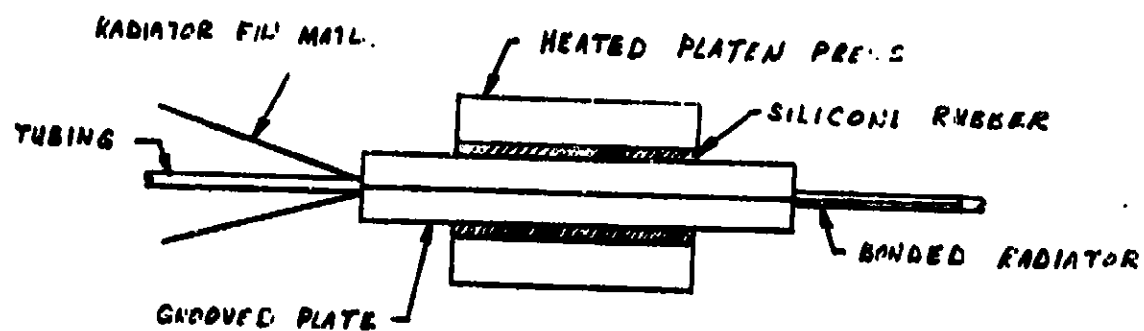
Apparatus For Fusion Bending Flexible Radiators
